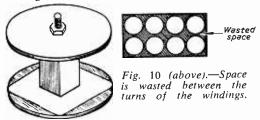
(left).—Mounting the coil former in wooden cheeks for winding.
